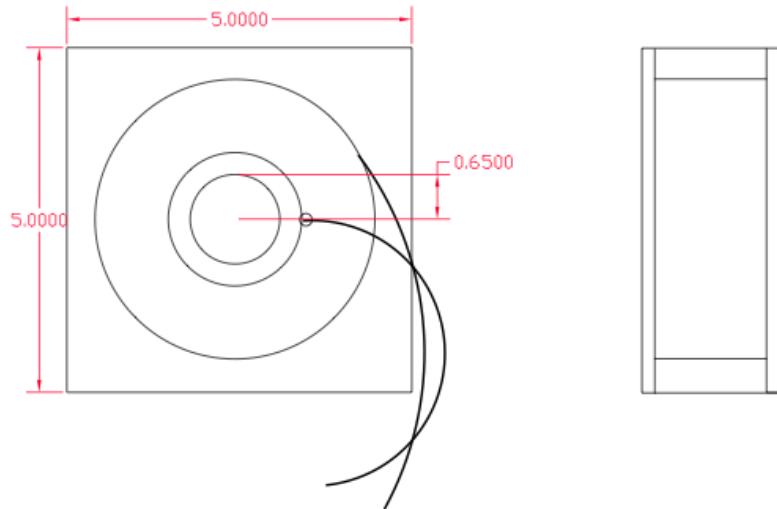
CAD drawing of coils used for model windbelt. (Theobald 2010)
